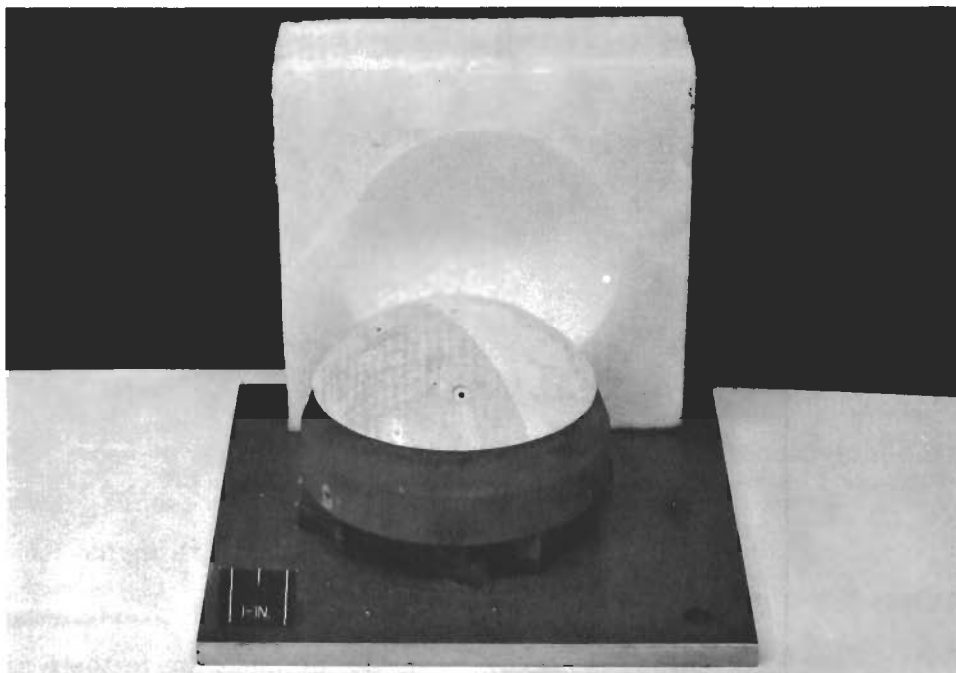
ASSET NOSE CAP AND LOAD BEARING TEST FIXTURE
